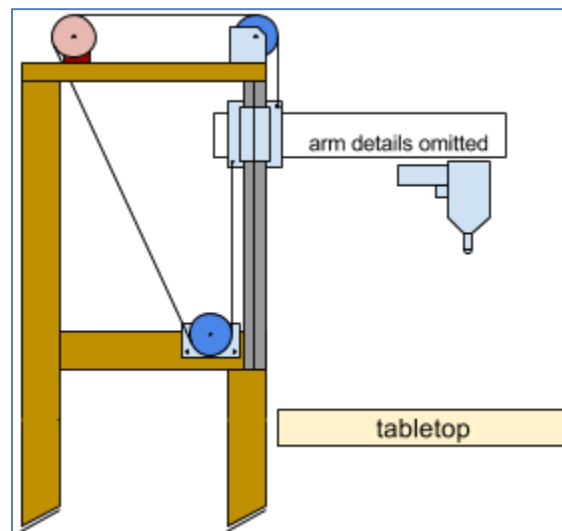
The existing mechanical drive system includes a closed chain loop around a driver sprocket (red) and two idler sprockets (blue).
